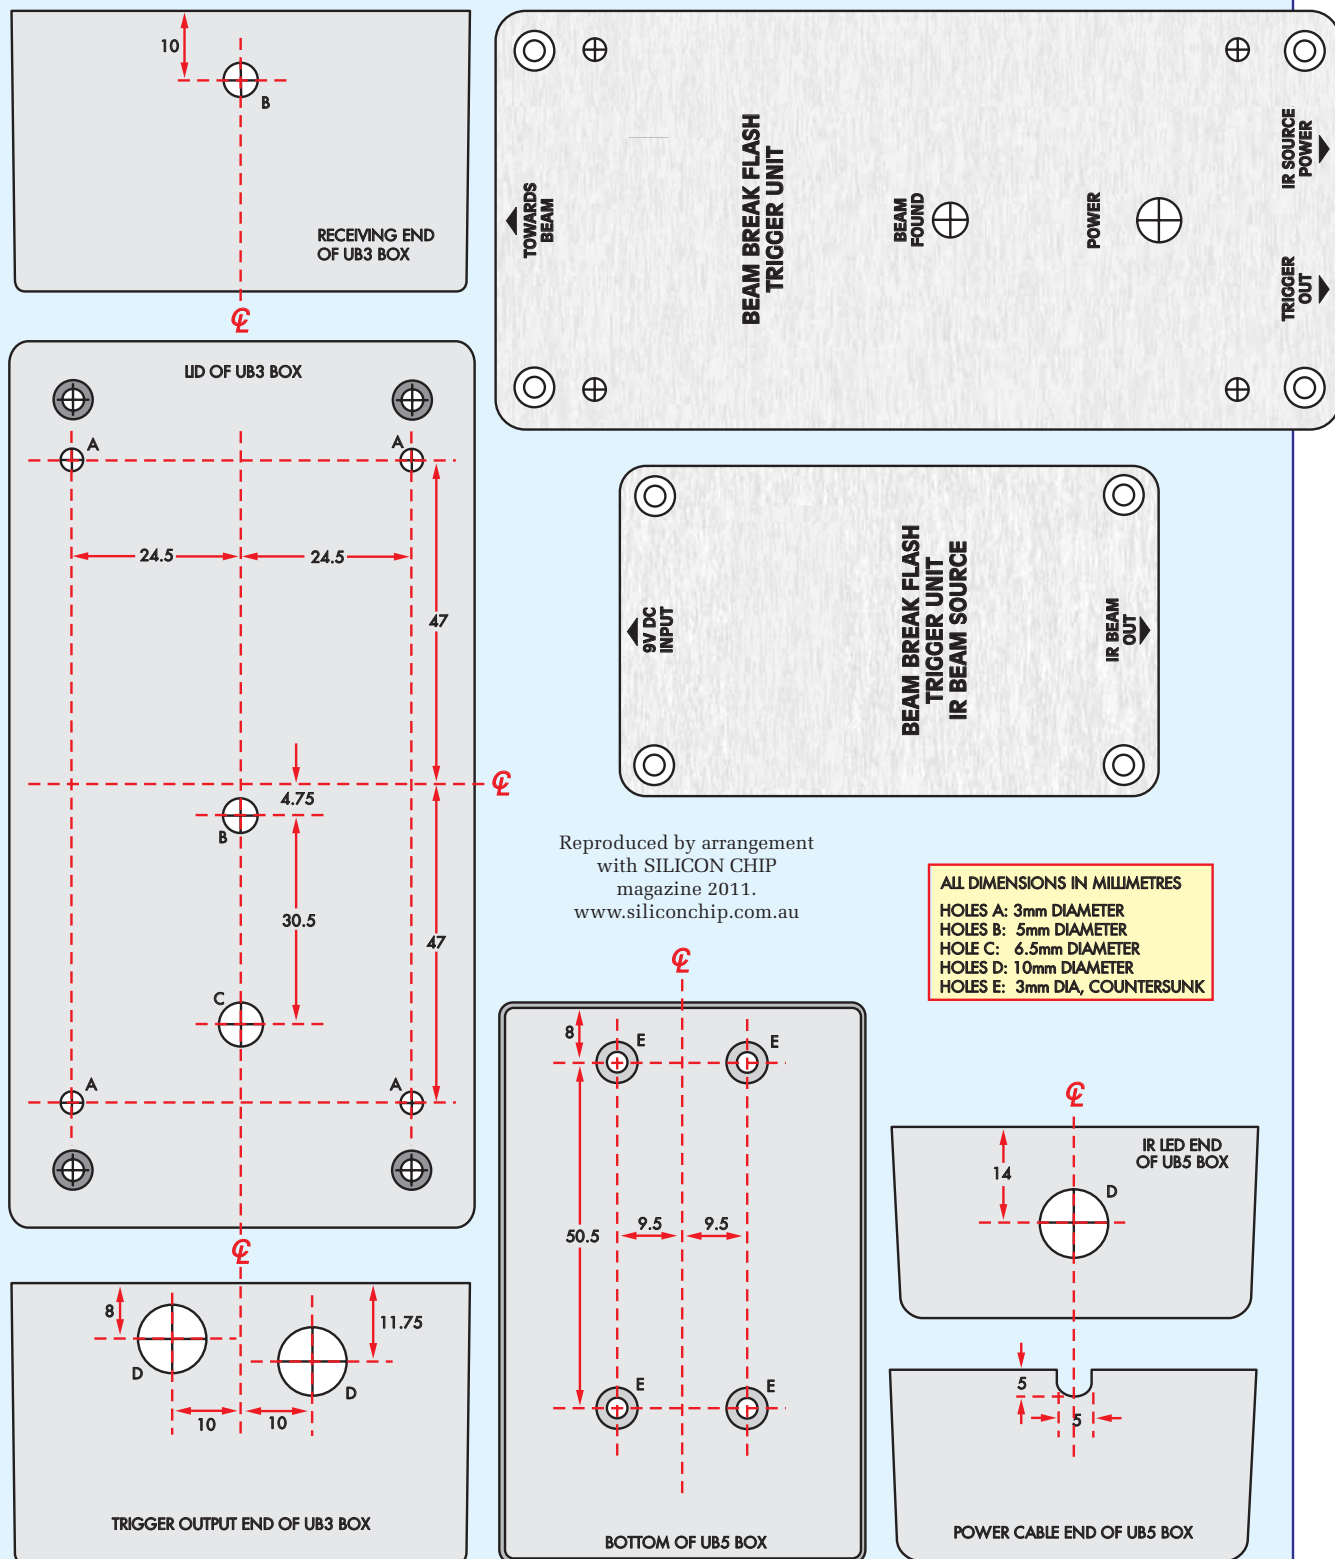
these drilling diagrams for the UB3 and UB5 boxes can be copied and used directly as templates, or you can mark the holes out manually using the measurements indicated. Also shown are the two front panel artworks. They can be photocopied, cut out and glued on the boxes.
